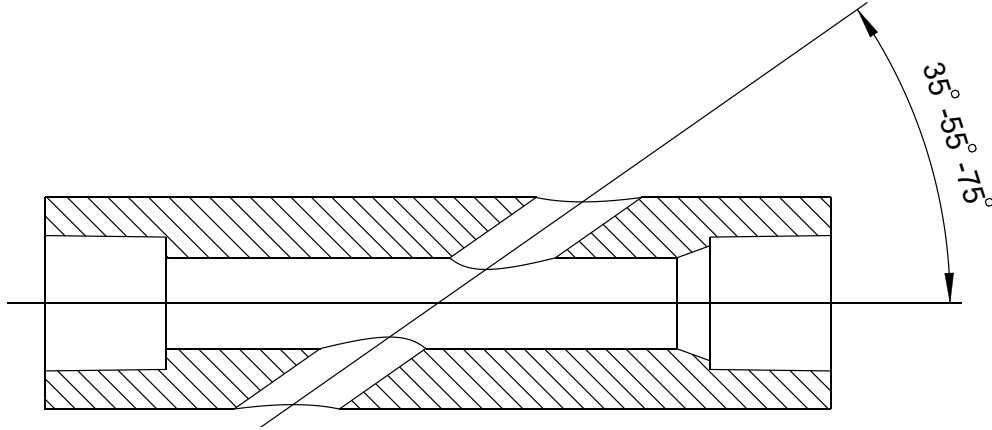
Drawing of the mechanical test structure with the 15mm horizontal flow path through the sensor and the 10mm angled transducer path. Both ends of the flow path have adapter cones for tubing and one side has beveled edges to minimise the disruption of the flow. Right to left makes the forward flow direction and left to right the reverse flow direction. Drawing by Lars Bolander, i3tex AB.
